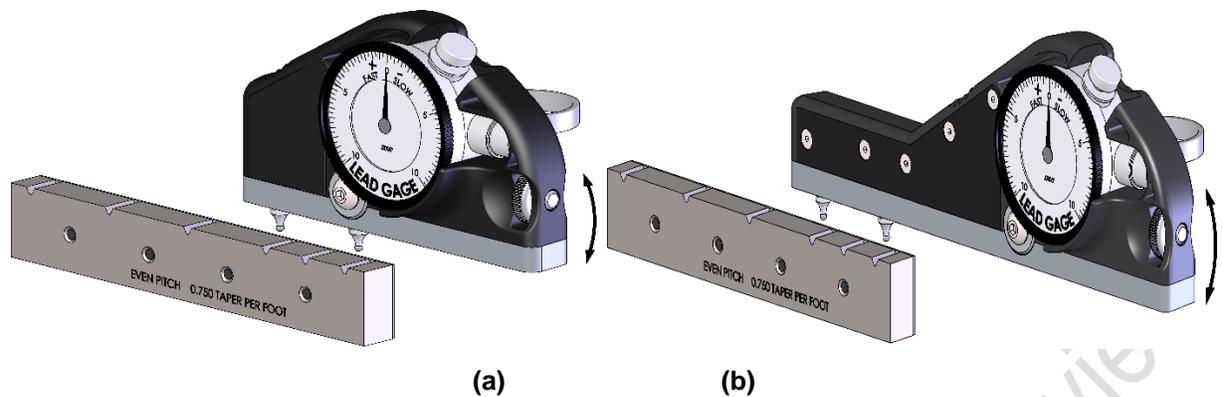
Lead Setting Standard with External/Internal Lead Gauge Applied—Round Threads
